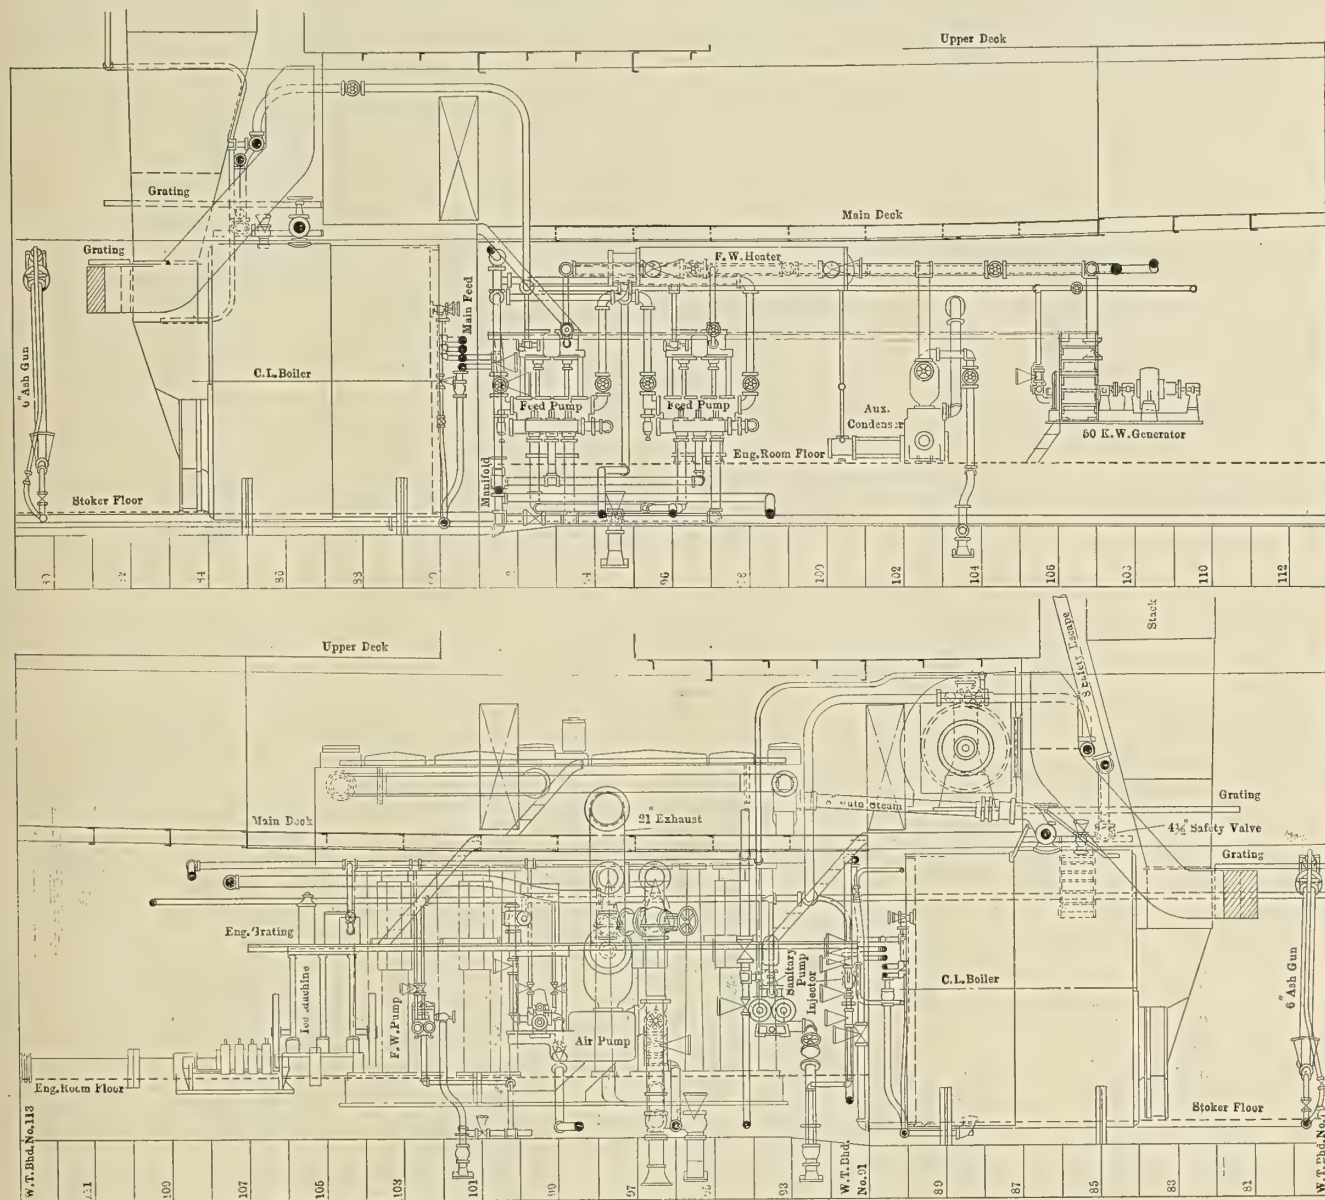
Port and Starboard Views of Machinery Space, Showing Piping Arrangement
